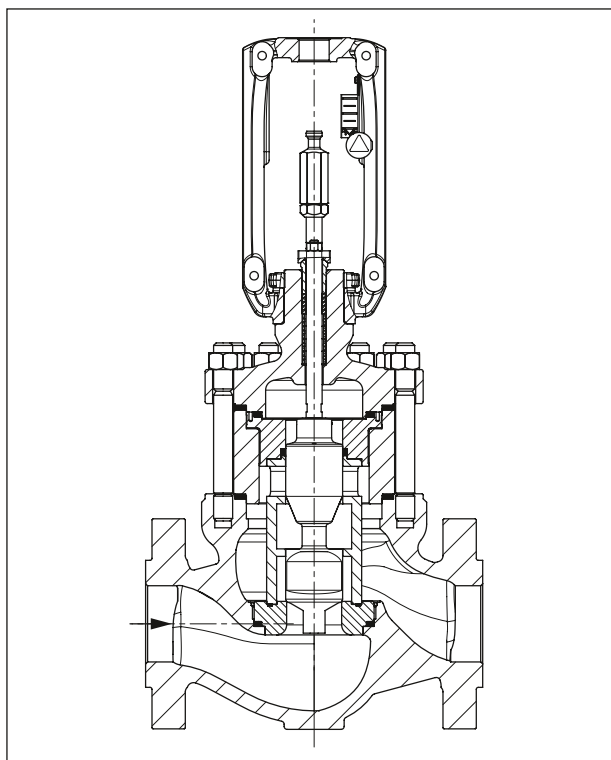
Type 261GR Globe Valve with 3-stage CDST plug
